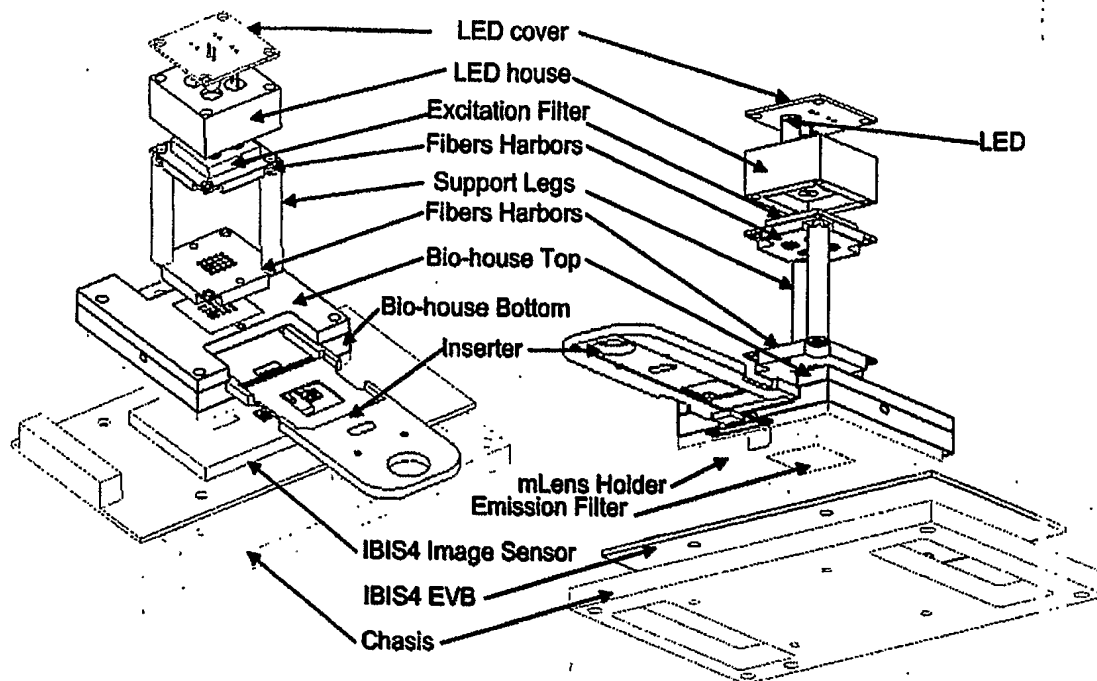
The Integrated System Electro-Opto Mechanical Assembly Scheme
